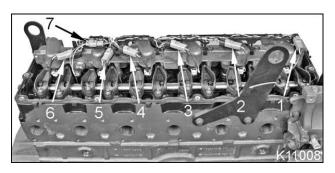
Under Valve Cover (UVC) harness (non-brake)
